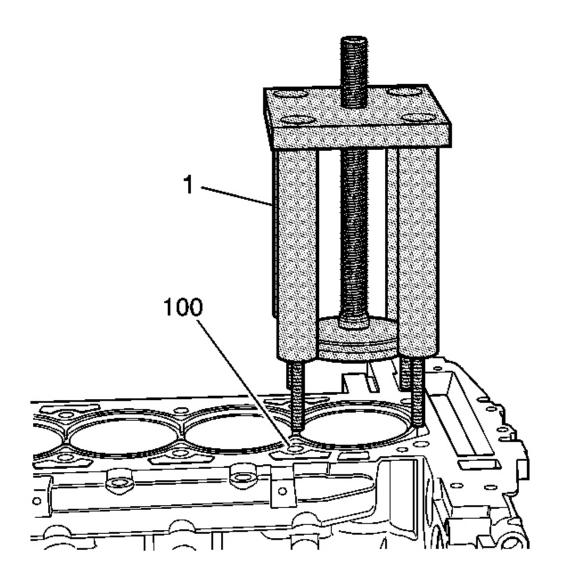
View Of Service Tool Assembly Courtesy of GENERAL MOTORS CORP.
